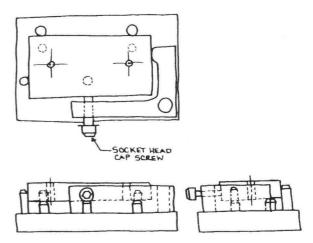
Hand-sketched drawing of a simple jig system extracted from the textbook [9], showing three orthogonal 2D views.
